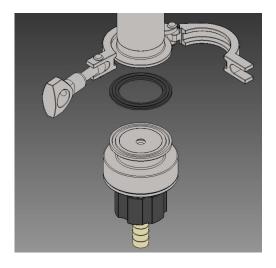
SAMPLE VALVE INSTALLATION
